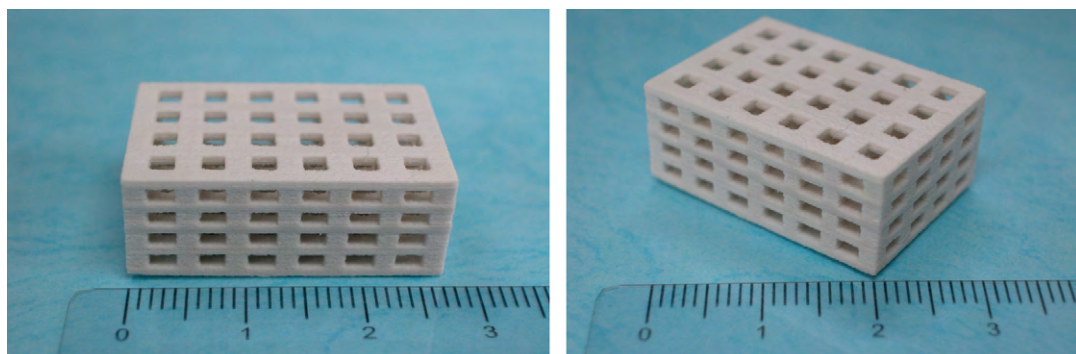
A 3D reticular ceramic part made by selective laser gelling with inner channel structure and dimensions of 27 mm × 19 mm × 11 mm.
